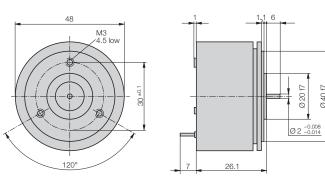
KINAX 3W2 with shaft dia. 2 mm, length 6 mm, standard version.
